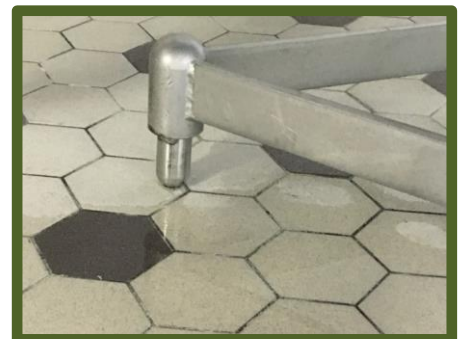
Examples of adjustable ball foot design – welded or gasket to seal and avoid debris infiltration
